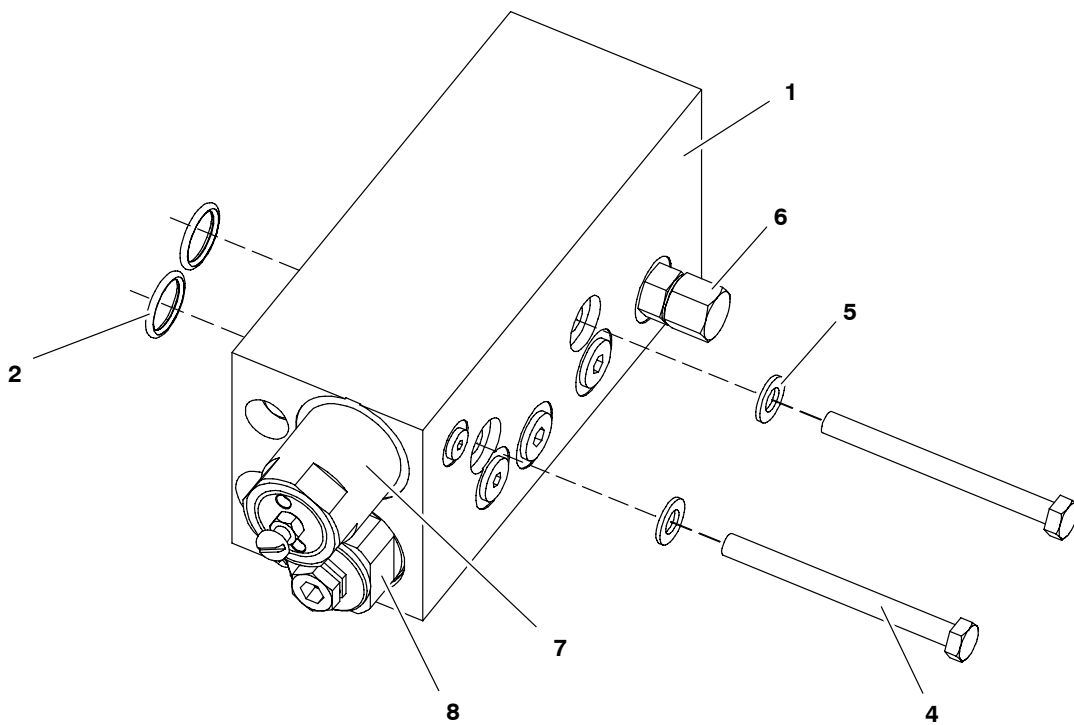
Manifold service kit parts, single-stream (filtered manifold shown)
